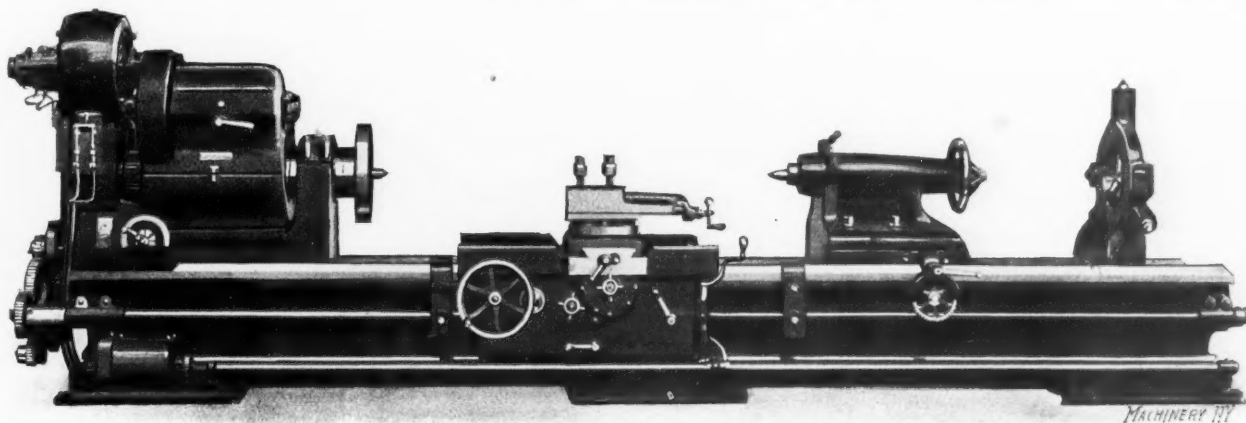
Heavy Motor-driven Lathe built by the Springfield Machine Tool Co.
